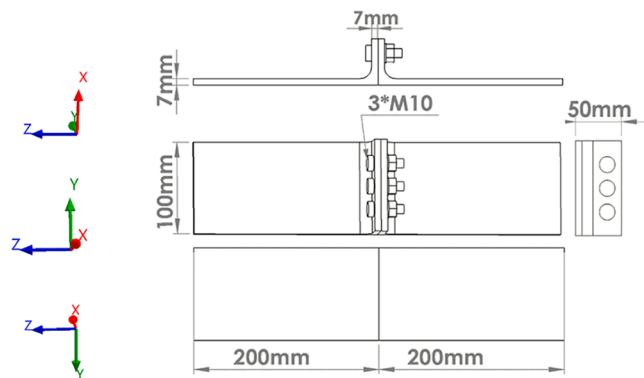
Bolted flange geometry and dimensions (mm) (From Jamia et al. [43]).
